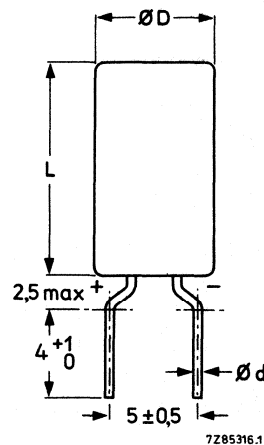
Style 3; case size 11 only; non preferred, see Table 3 for dimensions ϕd , ϕD and L.
